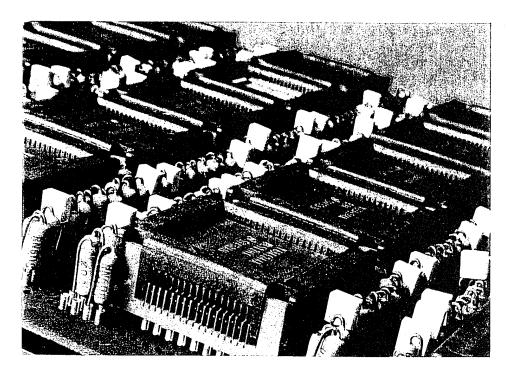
A close-up photograph showing the socket and discrete components of an assembled HAST board.
